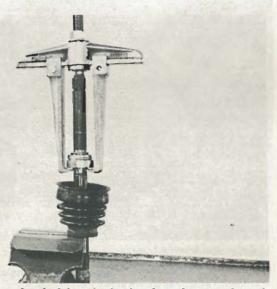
Removing the inboard gaiter bearing using a two-legged puller (Sec 8)
